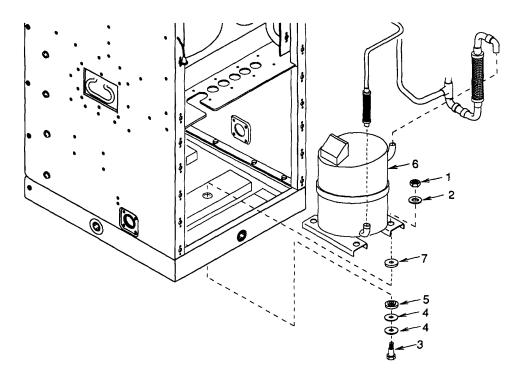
Compressor (B1) (Keco Industries, Inc.)
